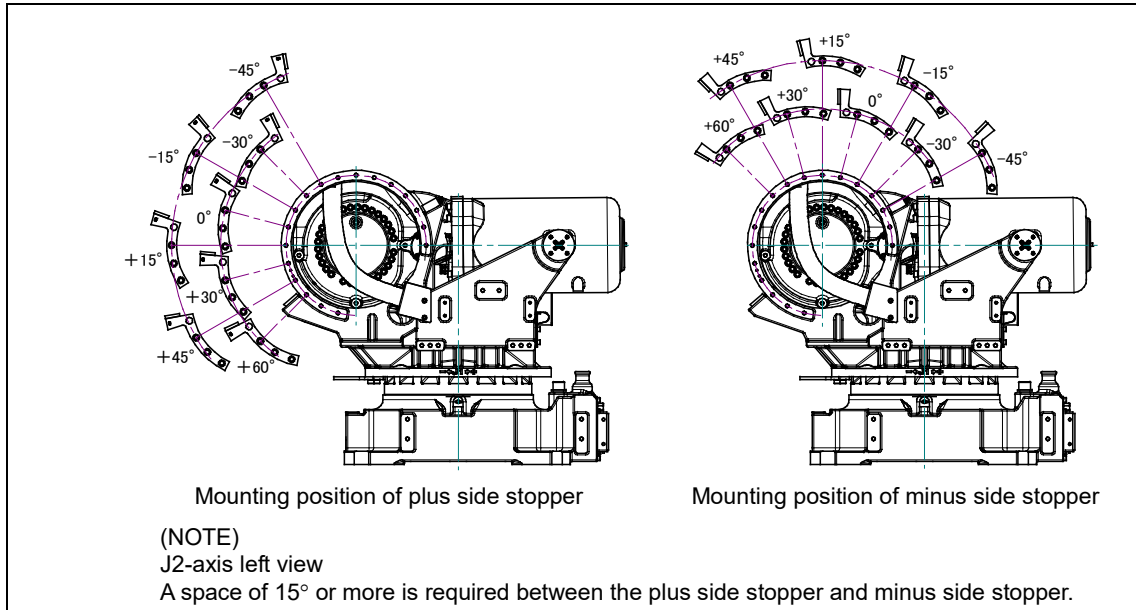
(d) Mounting the J2-axis mechanical stopper
